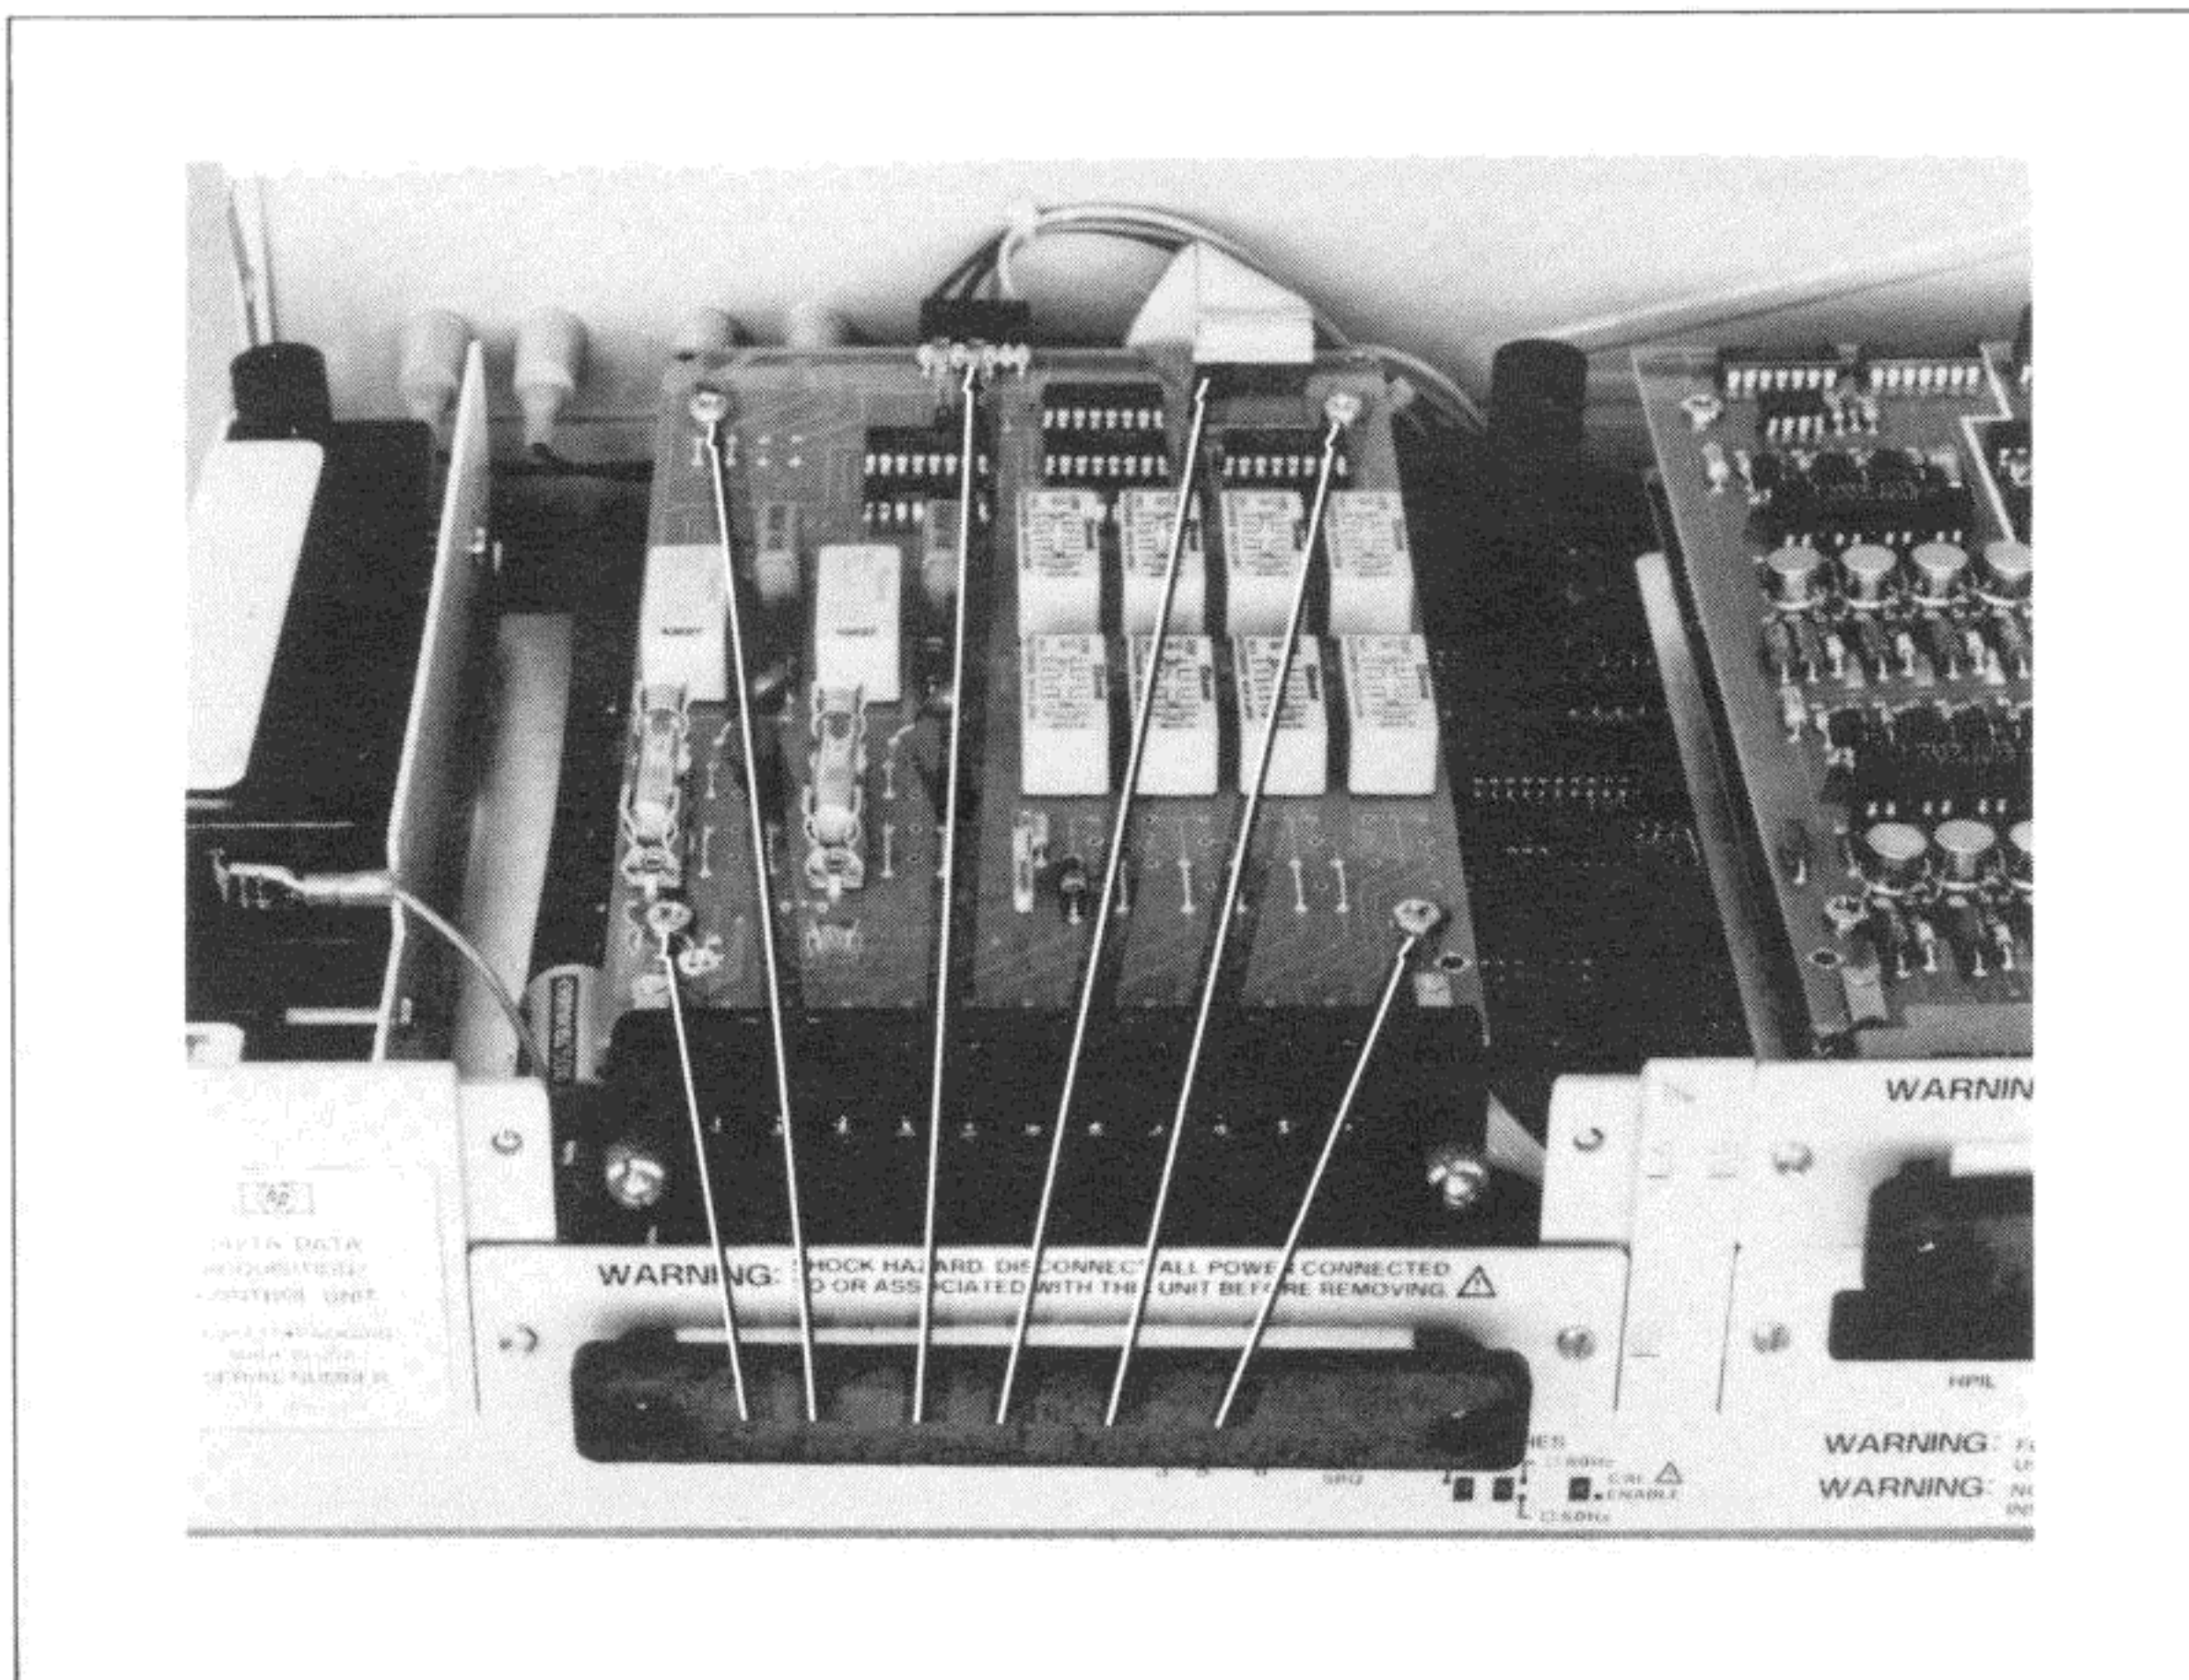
Unplug Option Cable(s) and Remove Option Screws
